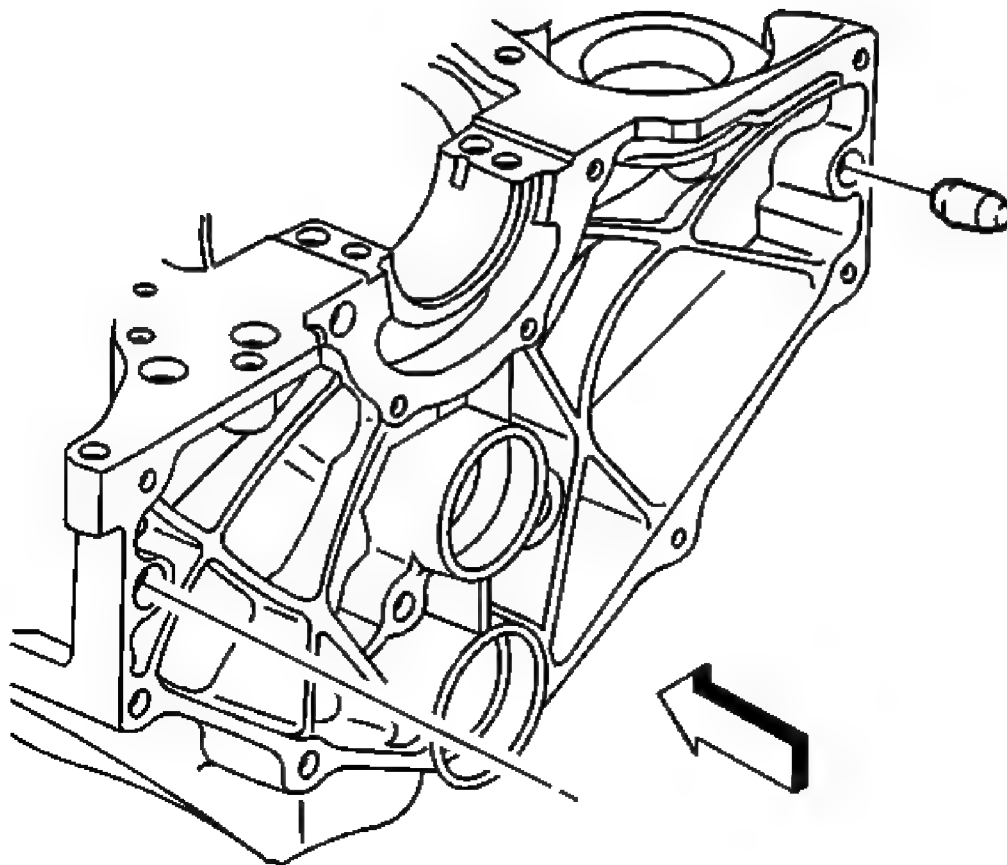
Locating Transmission Locator Dowel Straight Pins
